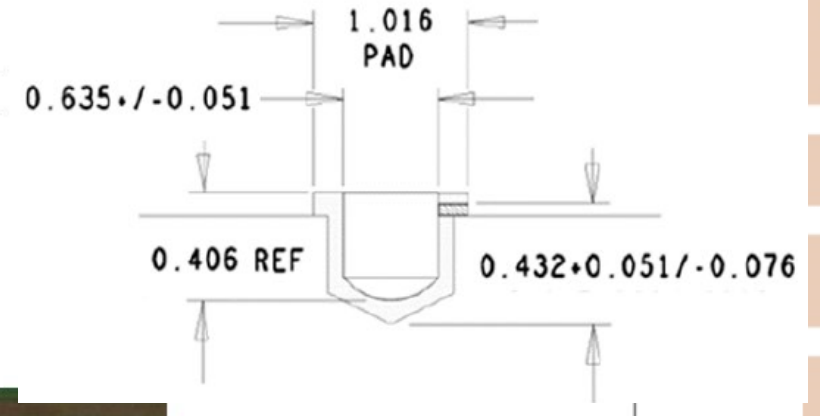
Backplane PCB Hole Dimensions – Typically Used for VITA 46.0
